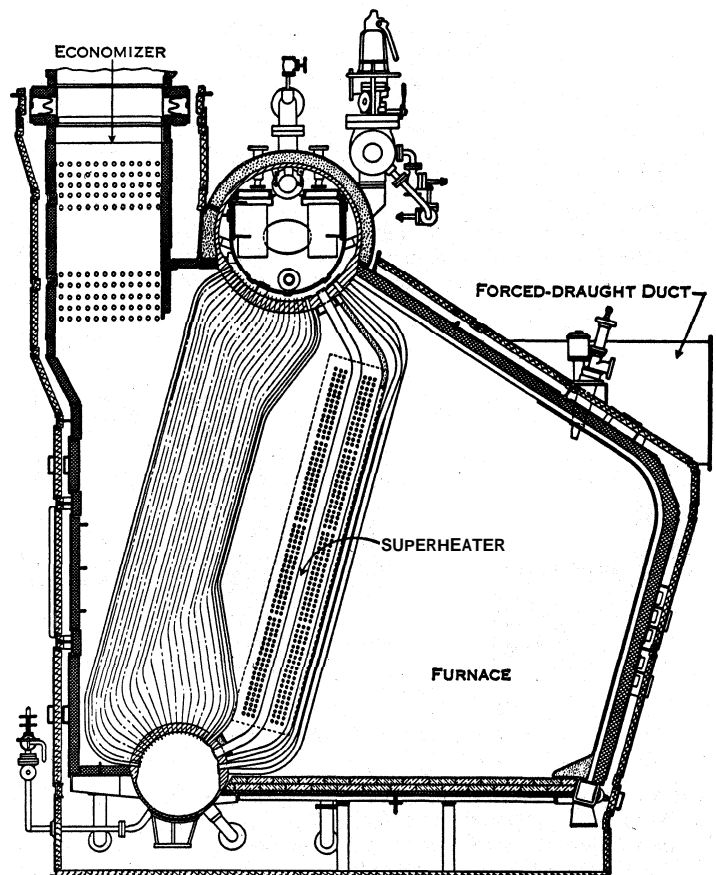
BABCOCK AND WILCOX MARINE WATERTUBE BOILER, INTEGRAL FURNACE TYPE
